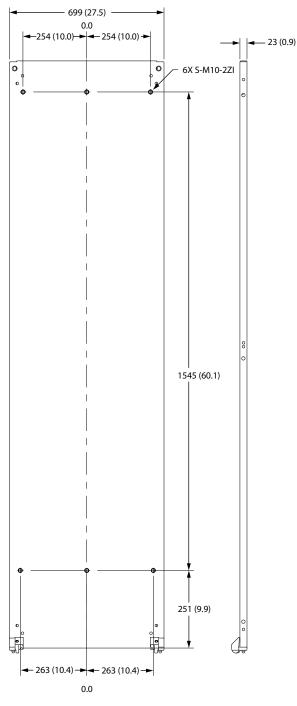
Mounting Plate in 800 mm (32 in) Cabinet
